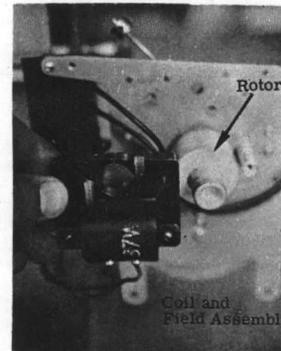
Rear View of Chronoflo Transmitter With Motor Coil and Field Removed
